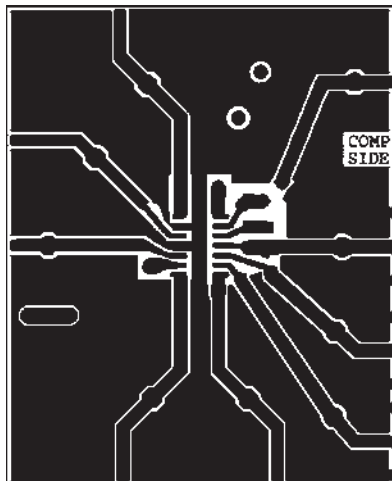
EVAL-AD8174EB Board Layout (Component Side)
